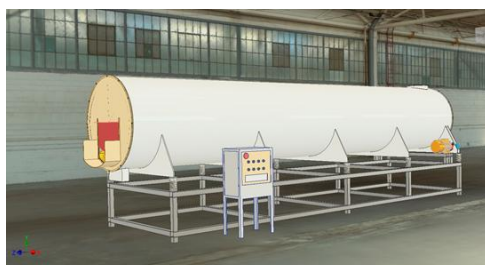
Three-dimensional model of a vibrating machine for dry cleaning of root vegetables
